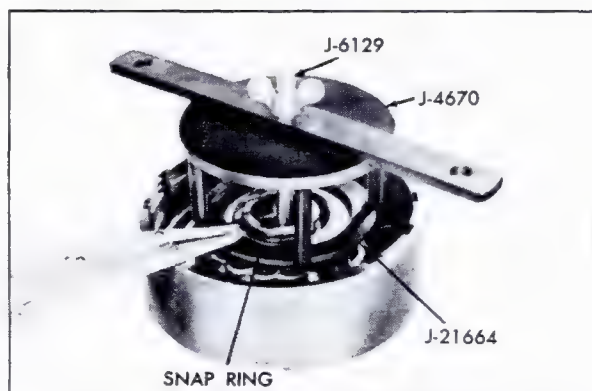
Removing and Installing Direct Clutch Housing Snap Ring
